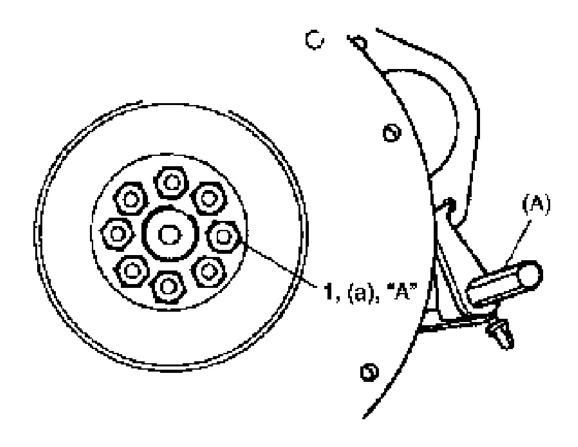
Tightening Flywheel Or Drive Plate Bolt Courtesy of SUZUKI OF AMERICA CORP.
